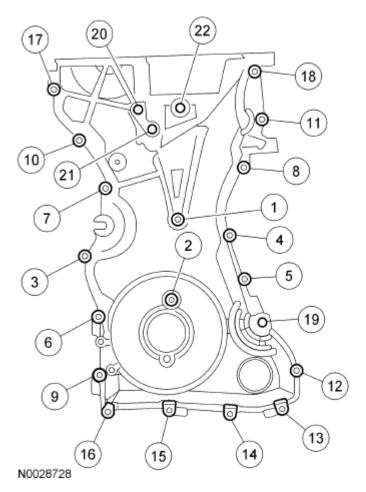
Identifying Tightening Sequence Of Engine Front Cover Bolts Courtesy of FORD MOTOR CO.
